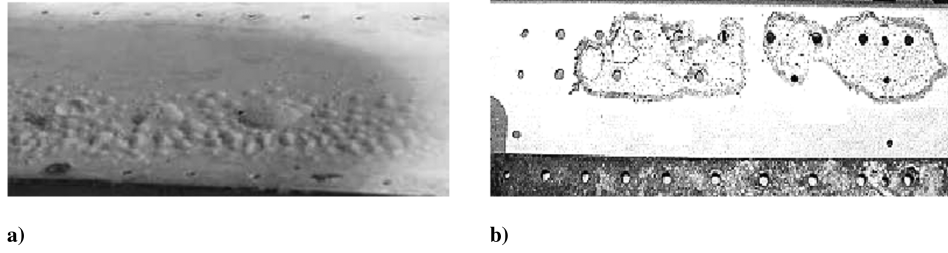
Example photographs of Y7 wing panel a) corrosion and b) after cleaning.
